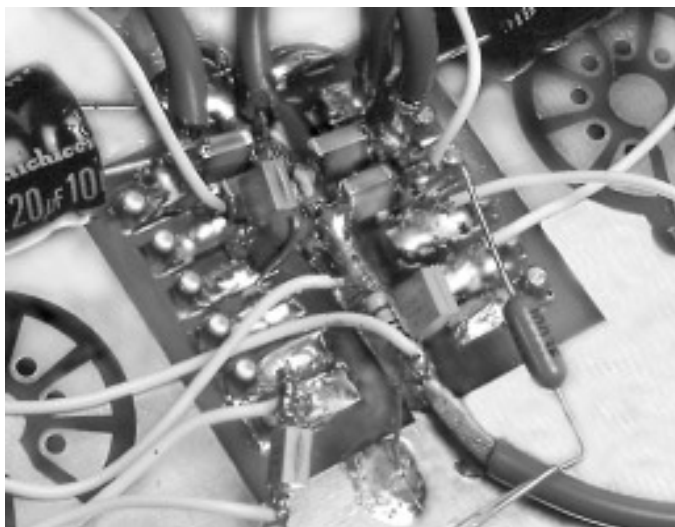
SOCKET DETAIL SHOWS THE CENTER OF THE STAR GROUND SYSTEM IS RIGHT IN THE CENTER OF THE SOCKET.
